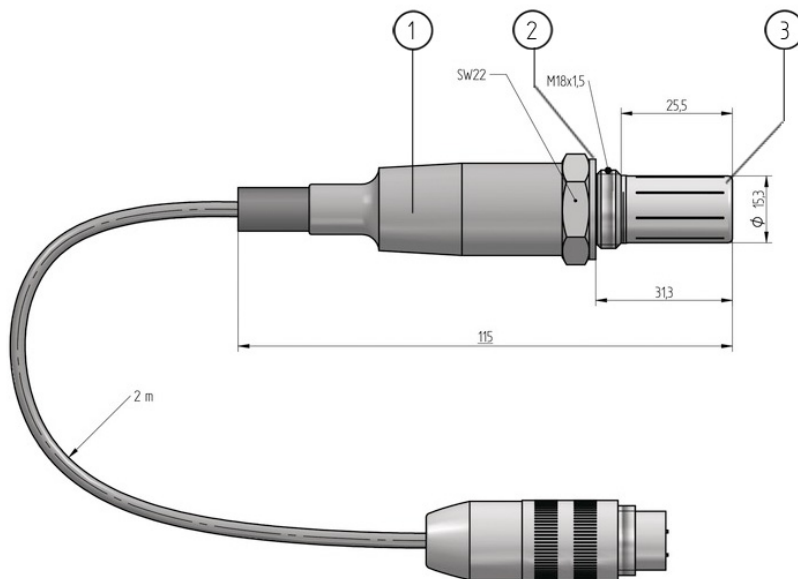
Dimensional drawing KS1D Combination Probe without housing
